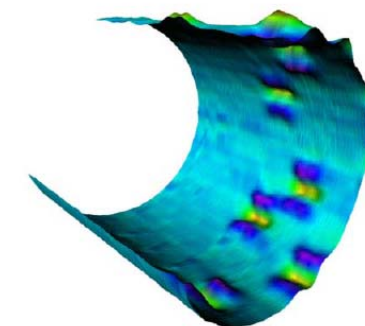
Isolation of Pressure Armour welding errors.
